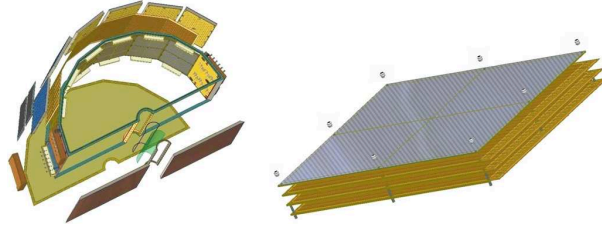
Left: exploded view of the HBD detector. One side panel is removed for clarity. Right: a photo-detector module consisting of a three GEMs and a mesh [29].
